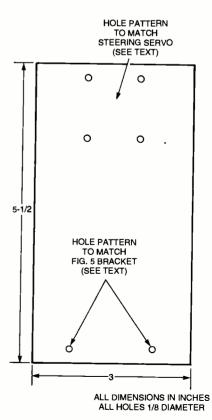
The main body of "Elmer, Jr." is a simple piece of sheet metal.
